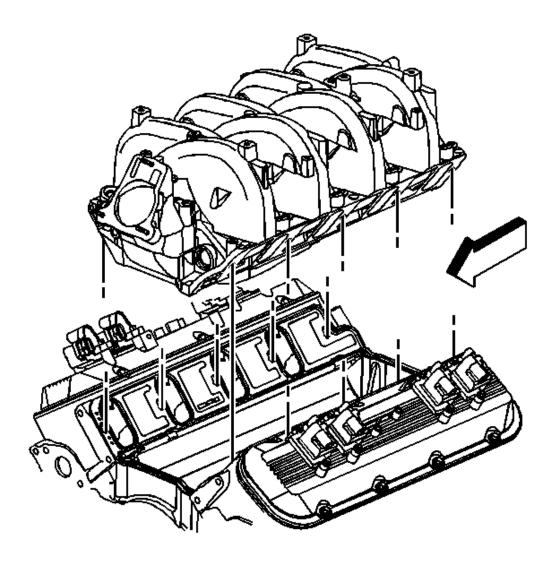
View Of Intake Manifold Courtesy of GENERAL MOTORS CORP.
